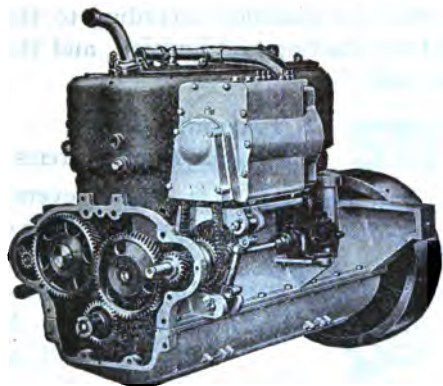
,028.—Entz single unit starting and lighting system; view showing mounting of motor dynamo on engine and silent chain drive.
